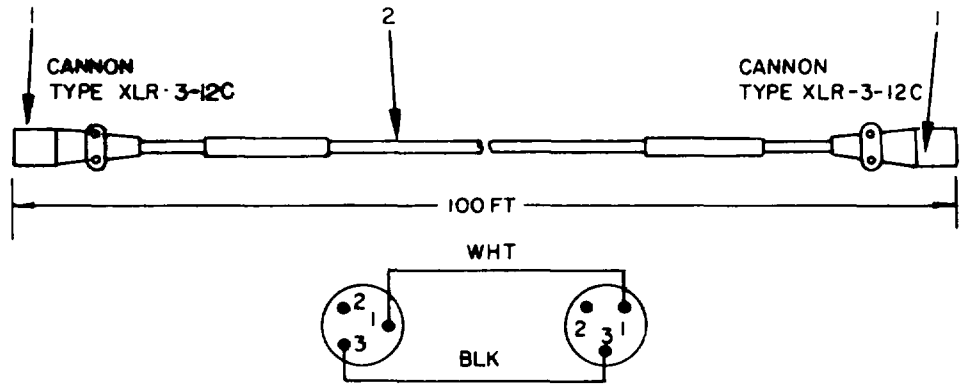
Cable Assembly, Special Purpose (SC-C-622024).
